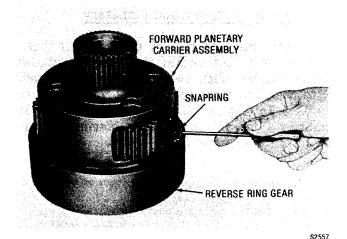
Removing snapring from reverse ring gear (TT, TTB 2221-1, 2421-1)
